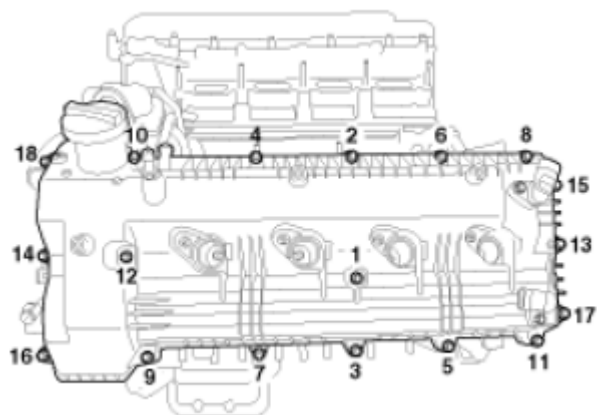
Identifying Cylinder Head Cover Bolts Tightening Sequence (LH)
